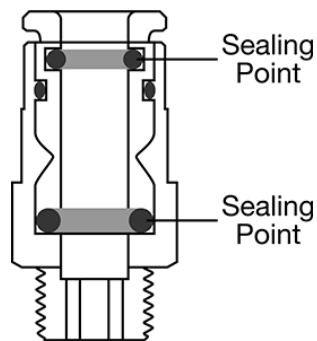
Push-to-Connect fitting. Tube not pictured.
